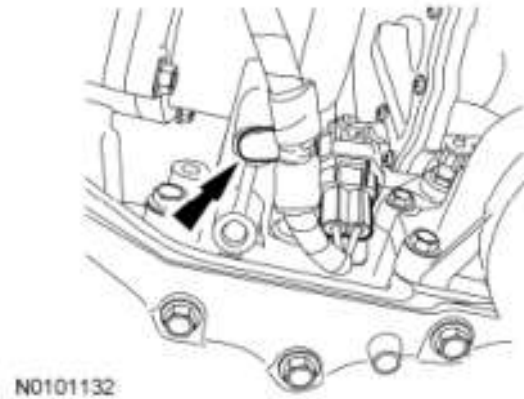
Locating Vacuum Pump Assembly Electrical Connector And Harness Retainer
